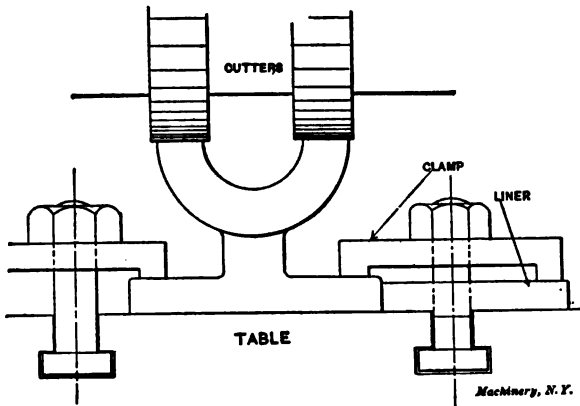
Holding the Base of Bearing while Milling Seat for Cap.
